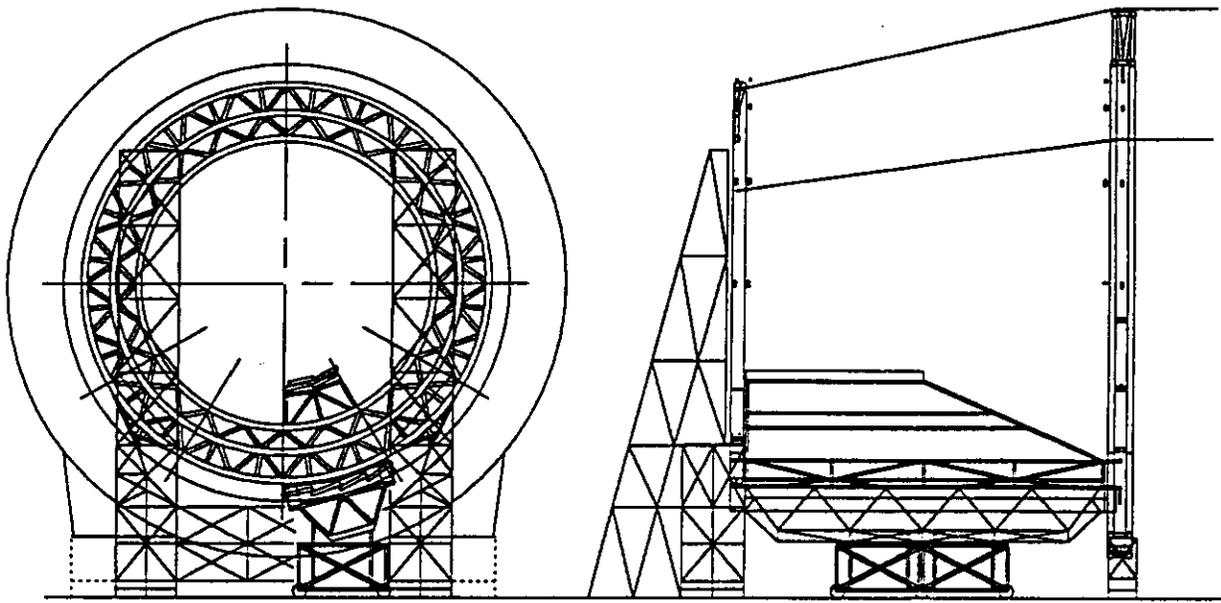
Initial Module Assembled Between End Support Rings
